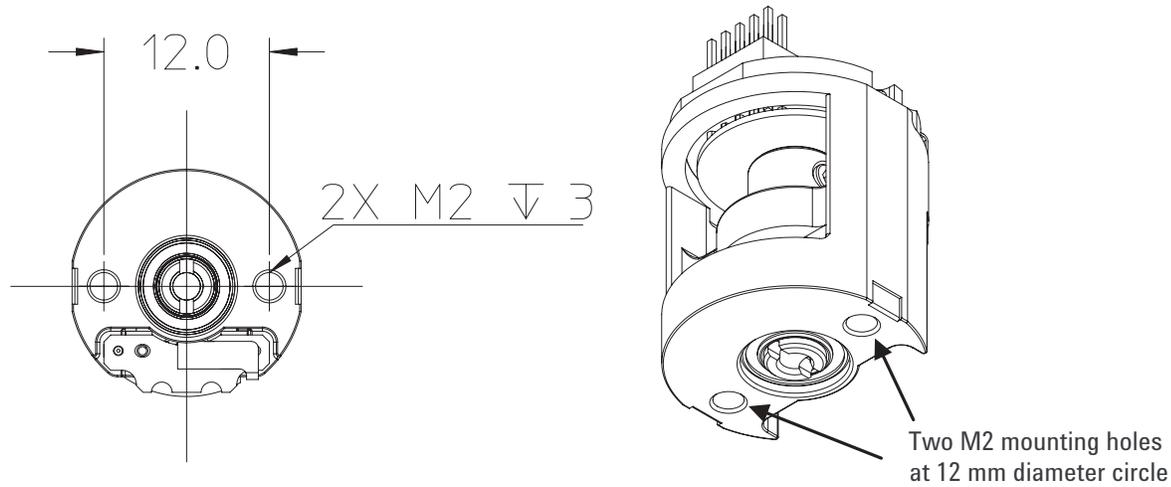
Mounting holes location for the AEDA-3300-Bxx encoder
